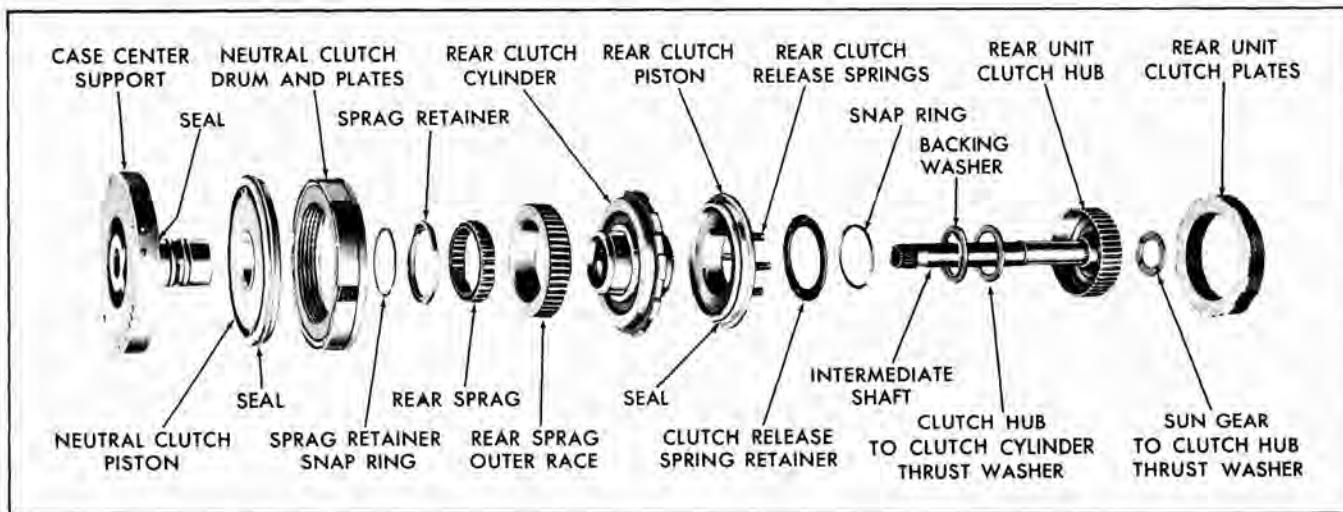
Case Center Support, Neutral Clutch and Rear Unit Clutch Parts—Exploded
